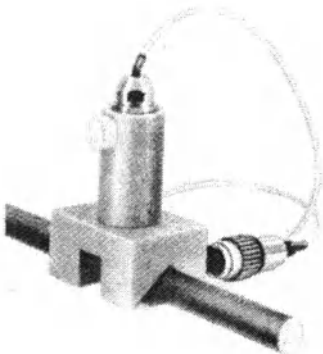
Probe holder for testing round stock by the immersion technique
